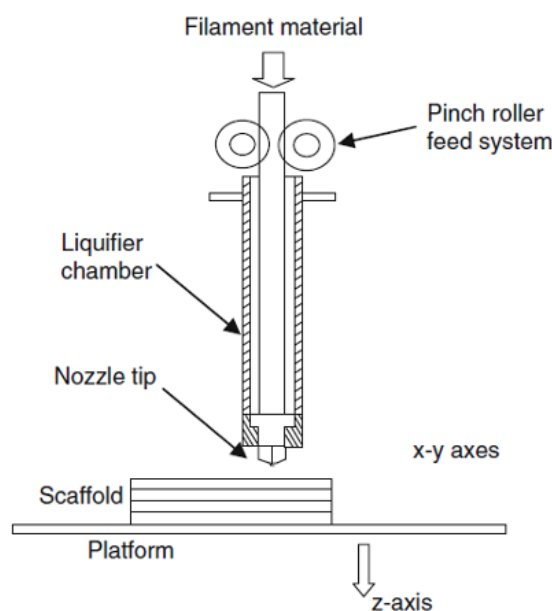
Example of the mechanism and parts of an FDM printing process [1].
